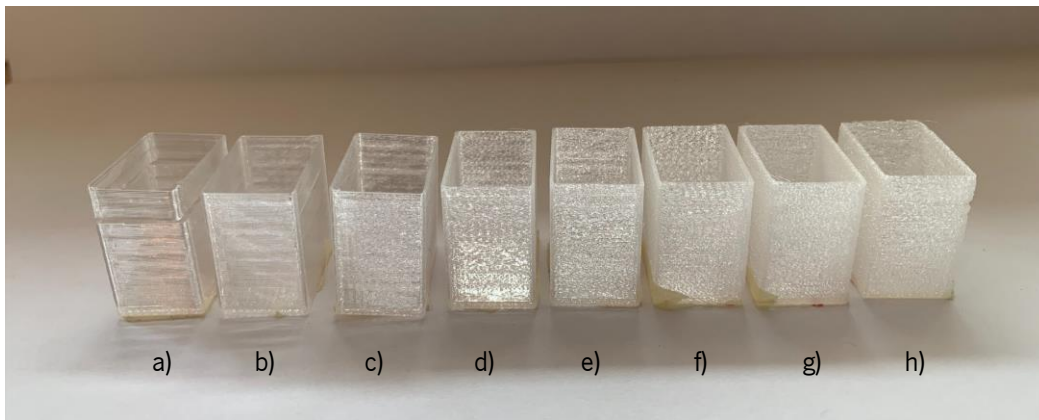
LV PETG cubic parts printed at a speed of 50mm/s at a) 200°C; b) 210°C; c) 220°C; d) 230°C; e) 240°C; f) 250°C; g) 260°C; h) 270°C
